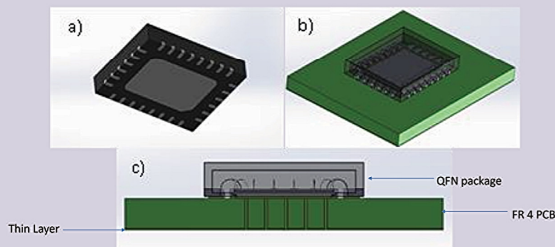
a) QFN package, b) QFN package mounted on PCB, and c) Thermal vias on PCB
